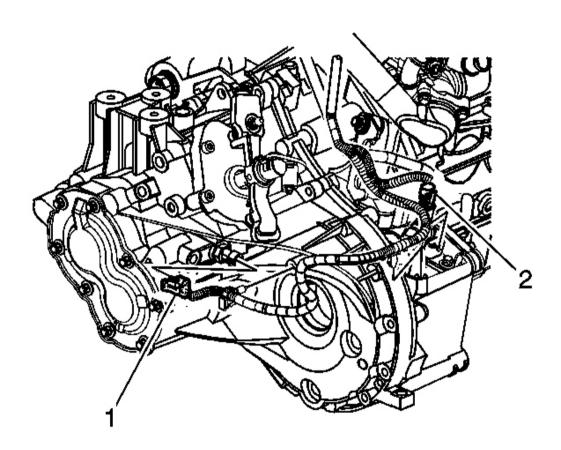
Front Wheel Speed Sensor VSS Electrical Connector Courtesy of GENERAL MOTORS CORP.
